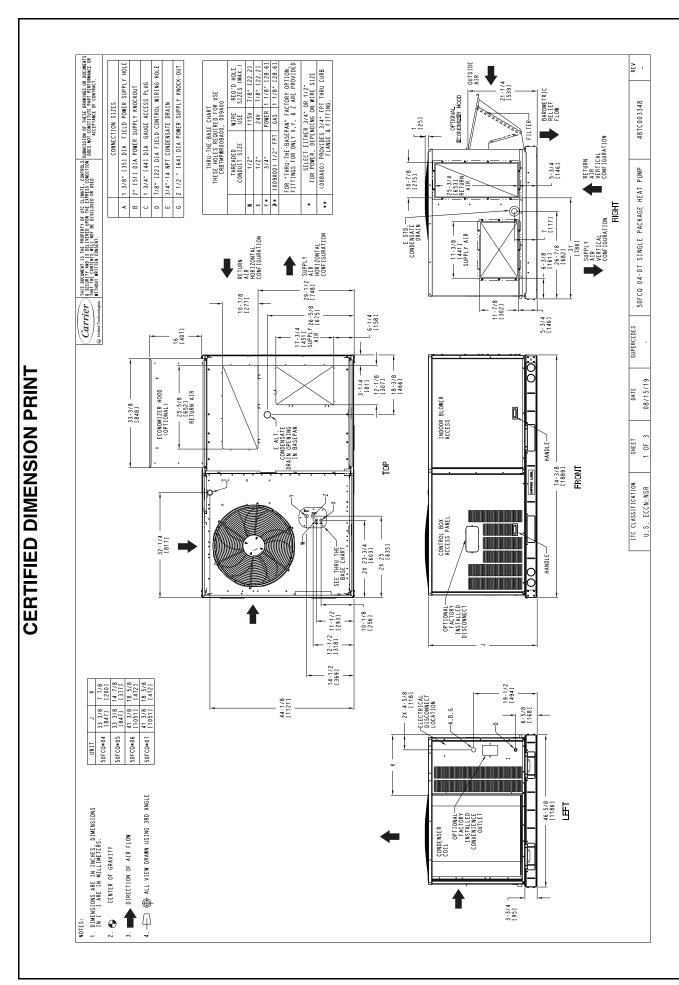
50FCQ*04-07 Dimensional Drawing
